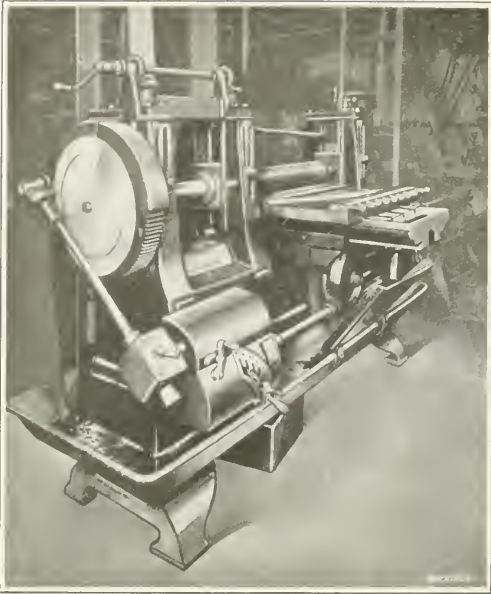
Hendey Milling Machine equipped for milling Teeth in Hacksaw Blades
